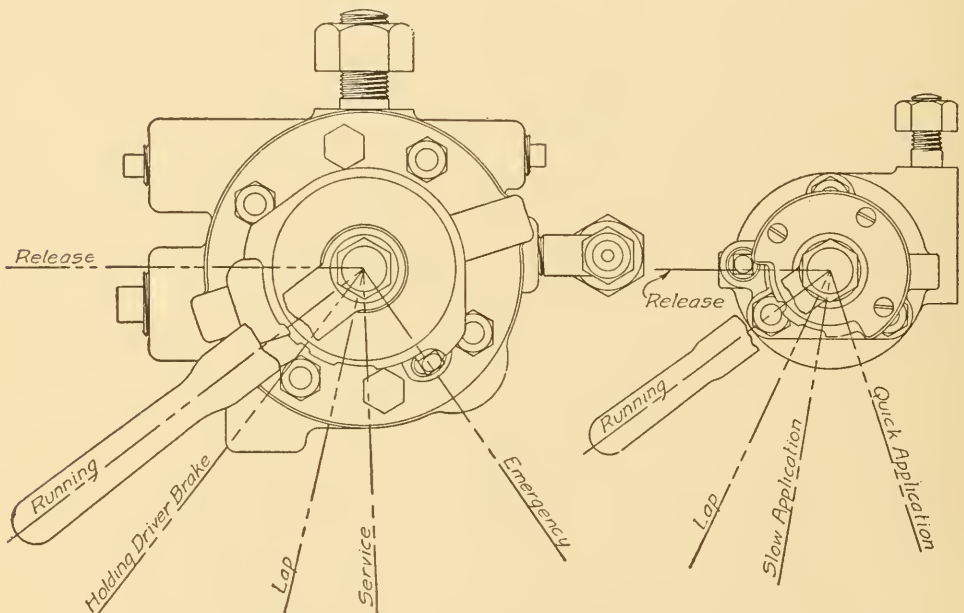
Diagrams Showing Positions of Valve Handles for Westinghouse Automatic and Independent Brake Valves
